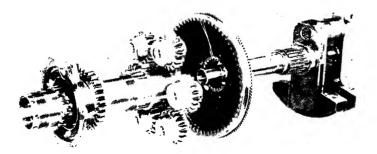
Arrangement of the Wright Cyclone type of planetary reduction gear.
